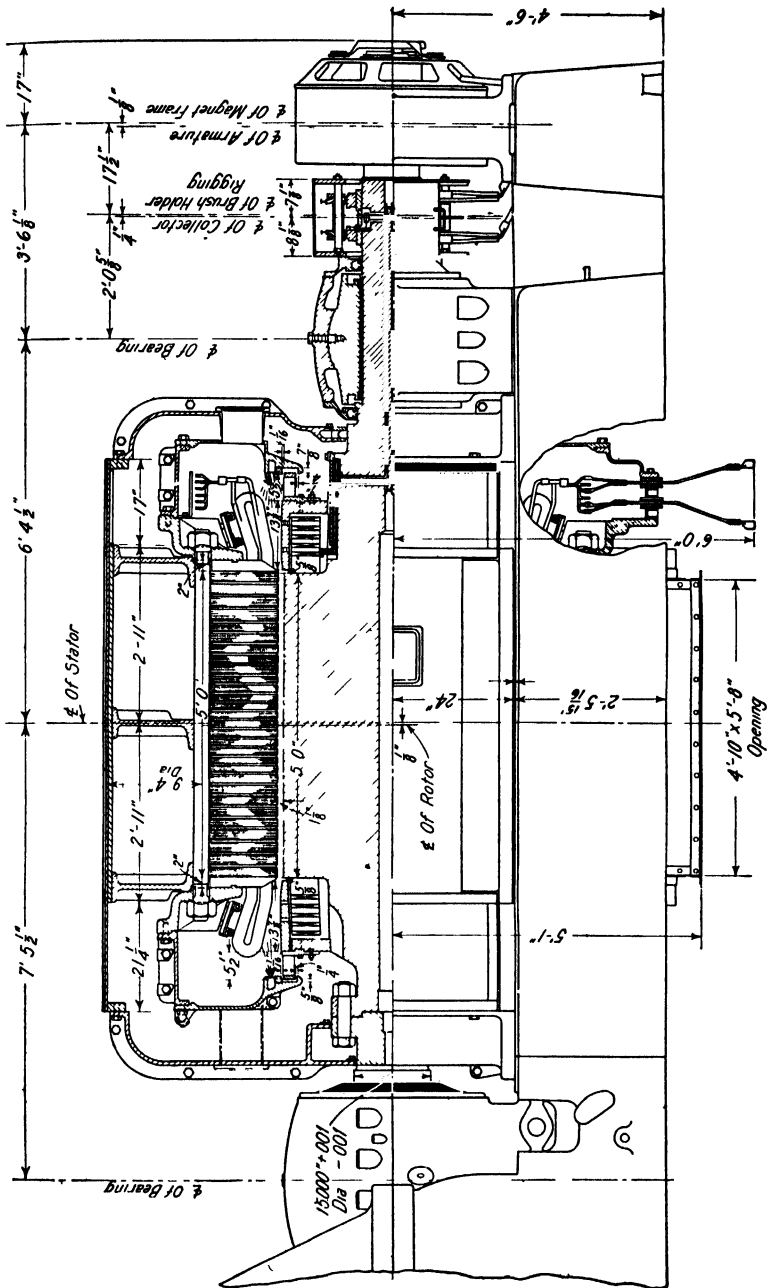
Sectional assembly of turbo-generator 12,500 kva, 1800 r.p.m., 13,200 volts
